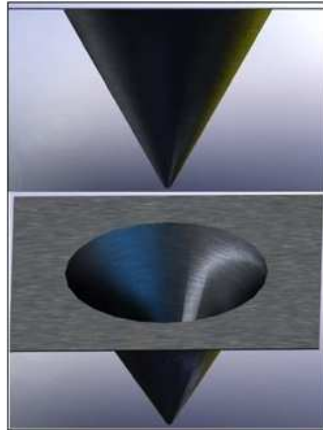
Geometry formed through incremental stamping on a modeled piece.
